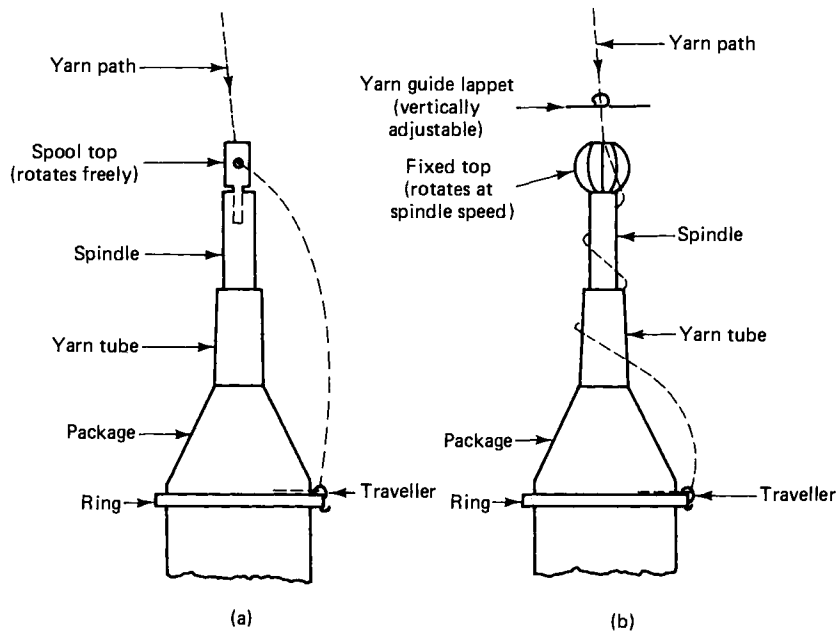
Suppressed balloon spinning ring spindle attachments: (a) spool top; (b) fixed top
